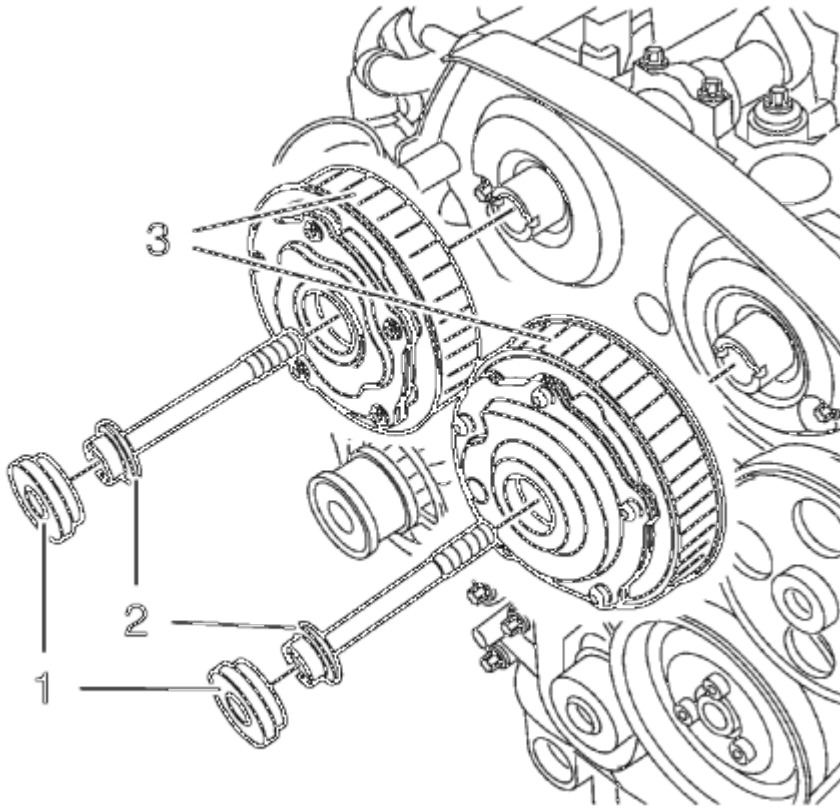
Camshaft Position Actuator Adjuster Closure Bolt
